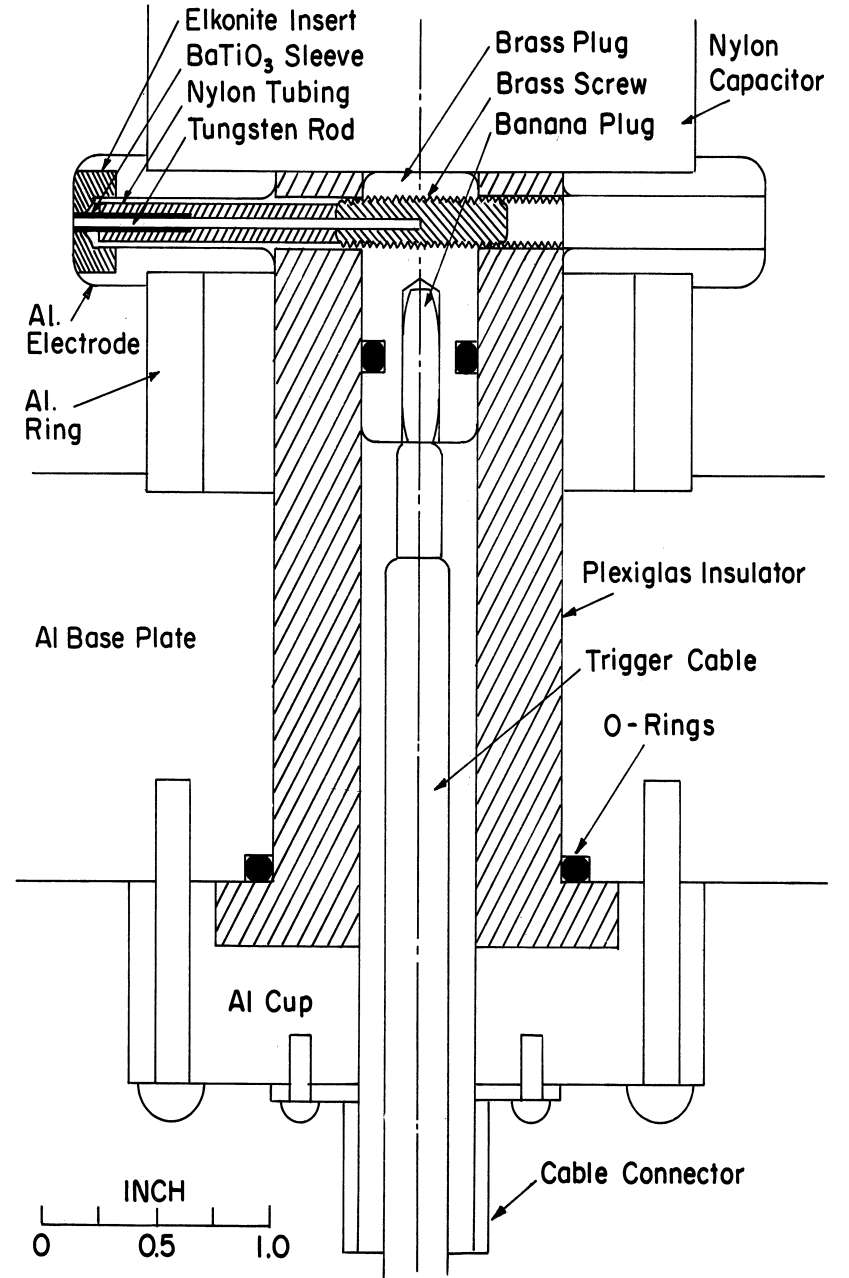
Details of Trigger Assembly of Model C Marx Generator
